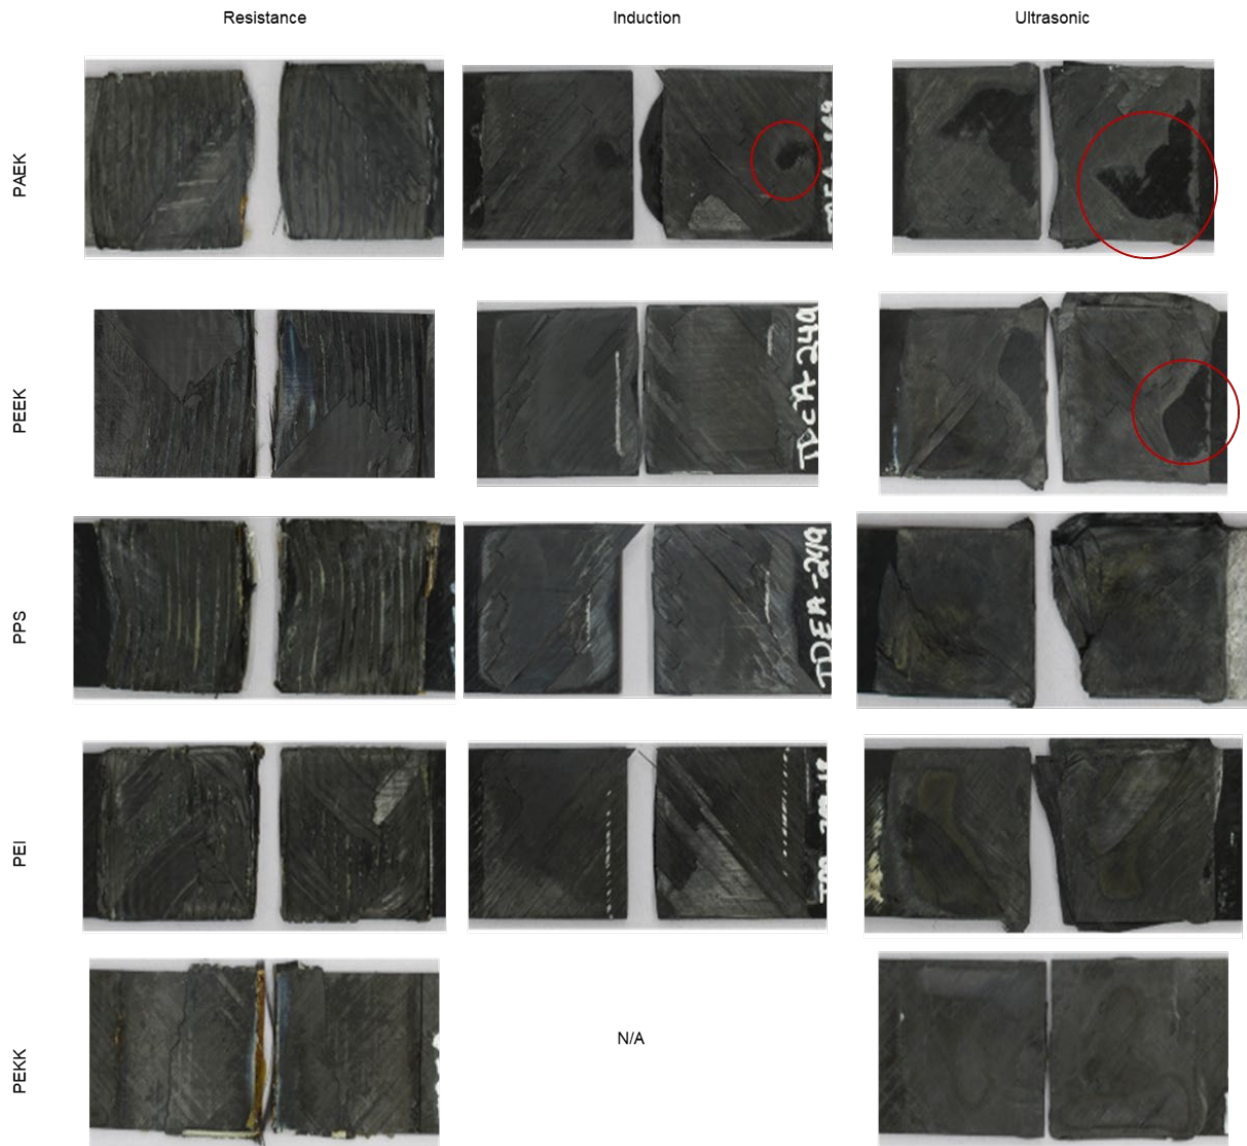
Fracture surfaces following single lap shear tests of each material welded by RW, IW, and UW.
